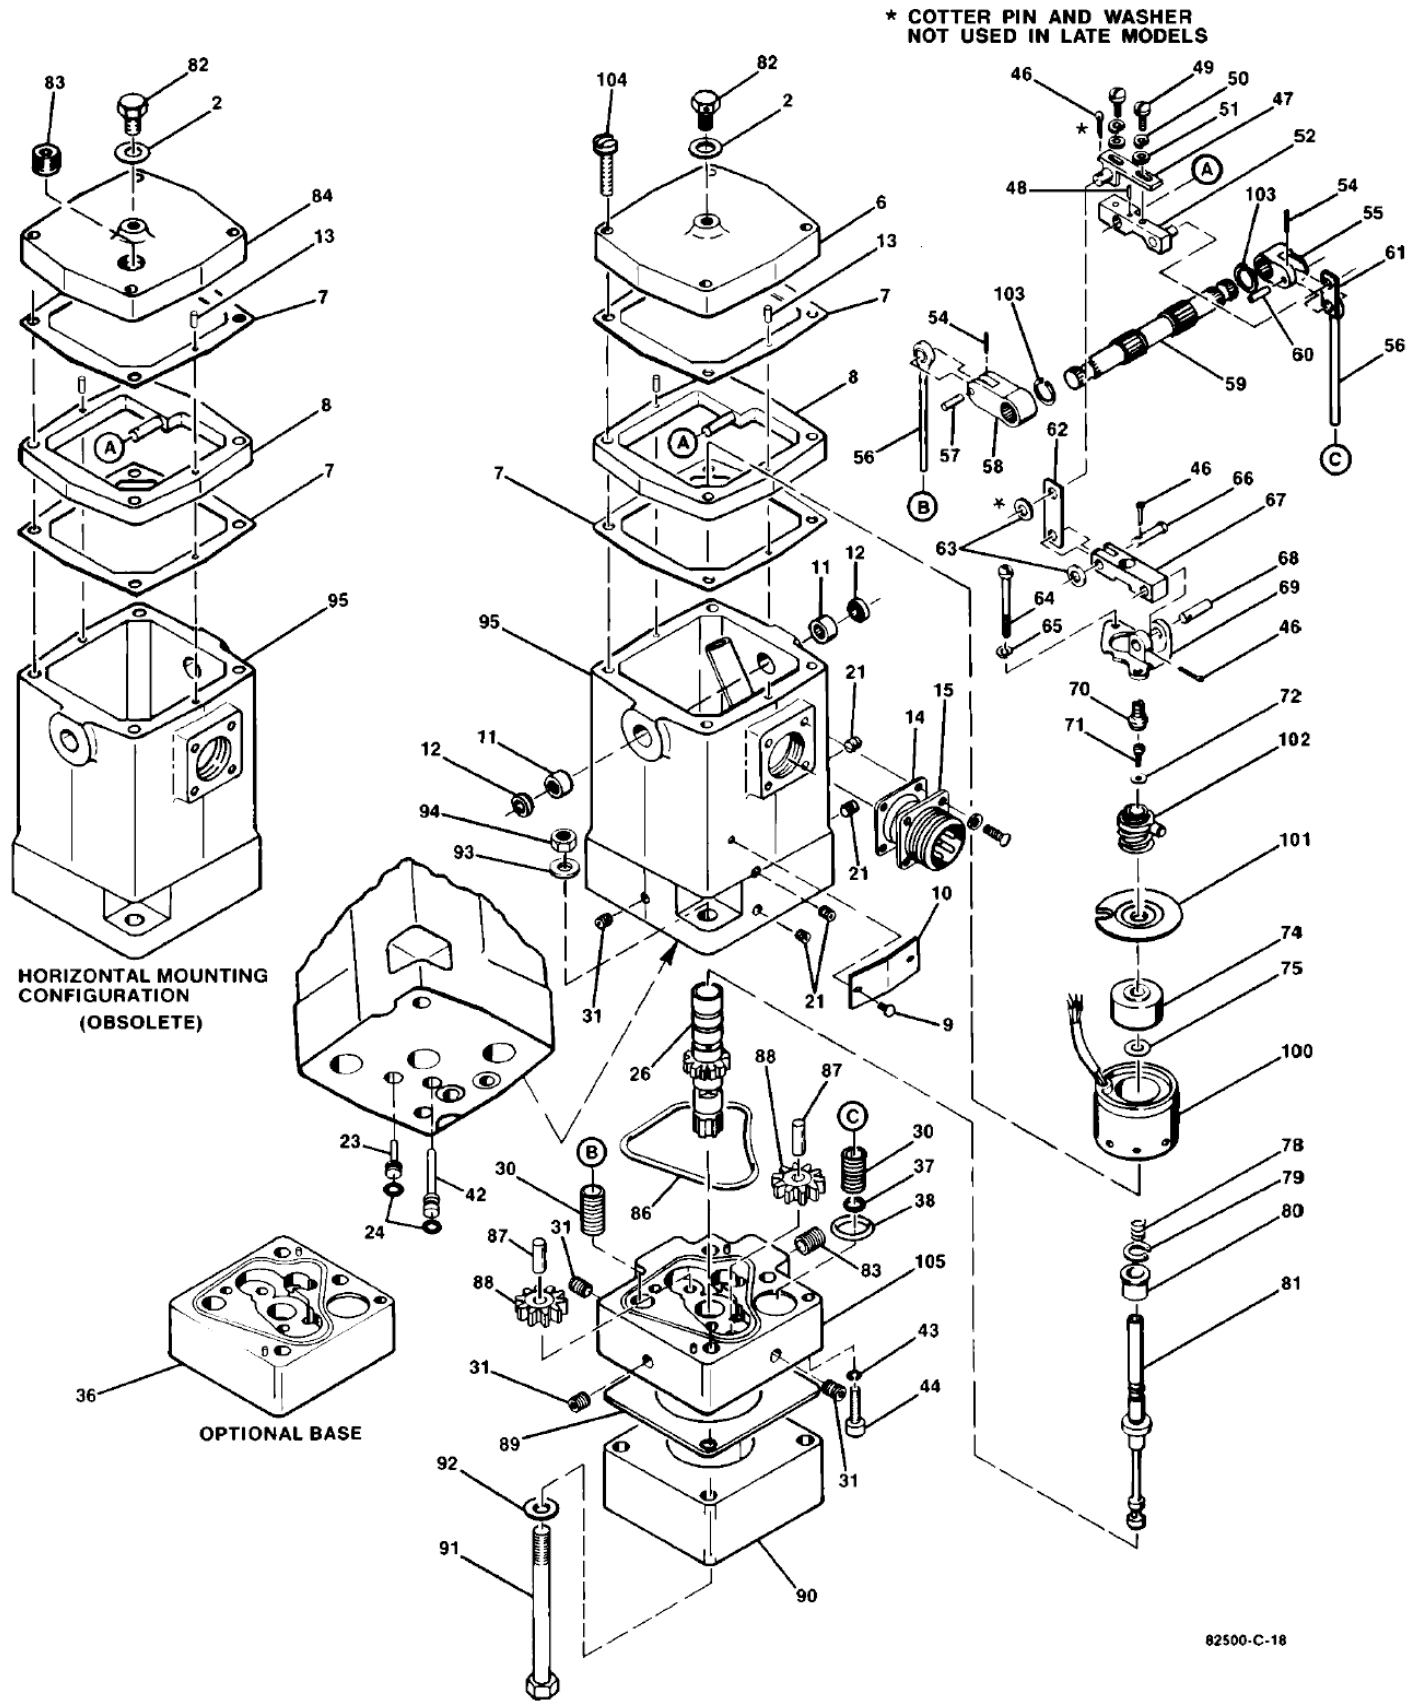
Exploded View (EG-3P with Oil Motor)
